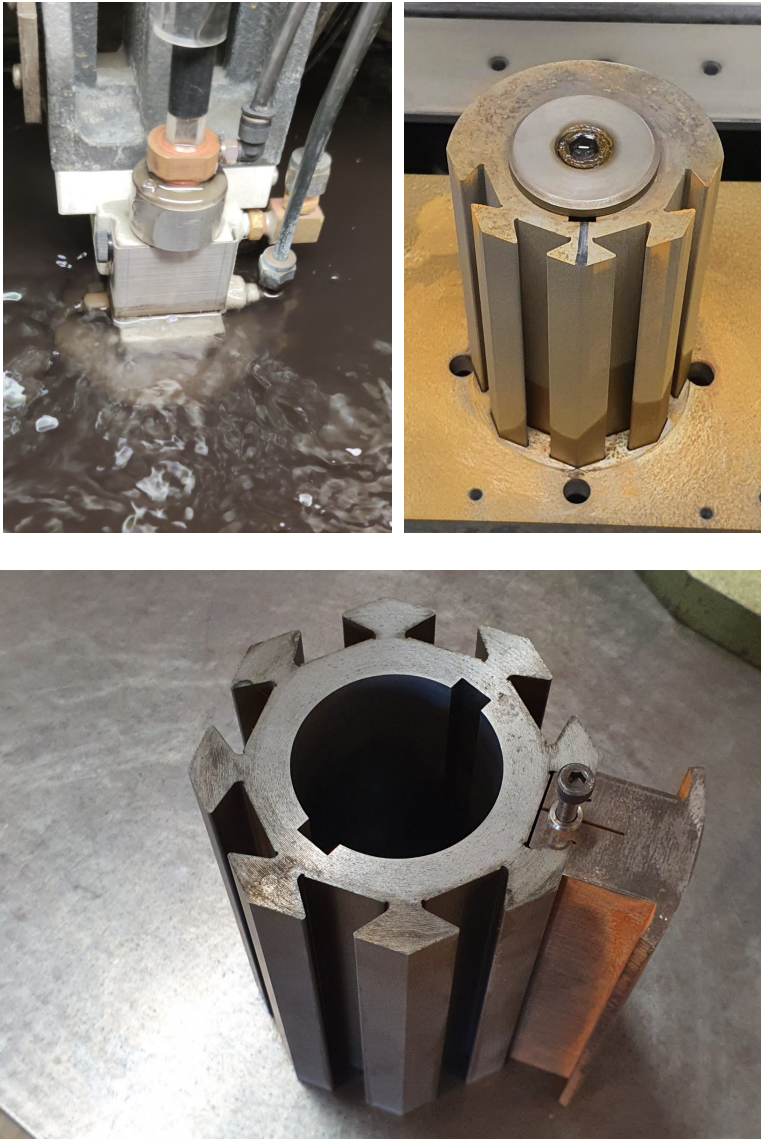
Top left: Rotor yoke submerged in water while electric discharge machining is performed. Top right: Rotor yoke after having four dovetail joints machined. Bottom: Finished rotor yoke with one tooth in place.
